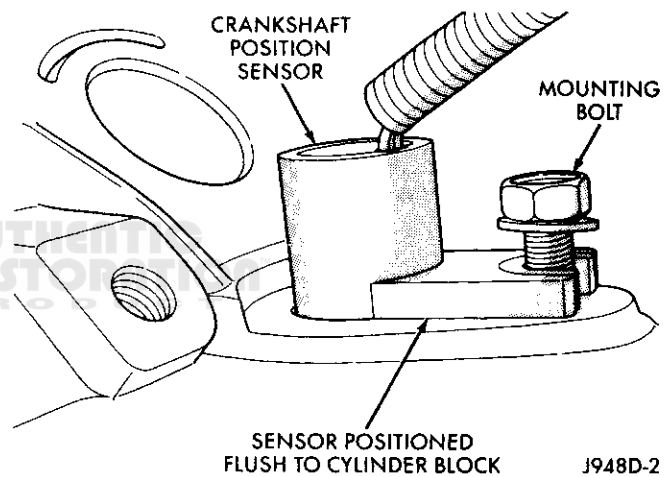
Sensor Removal/Installation—8.0L V-10 Engine
